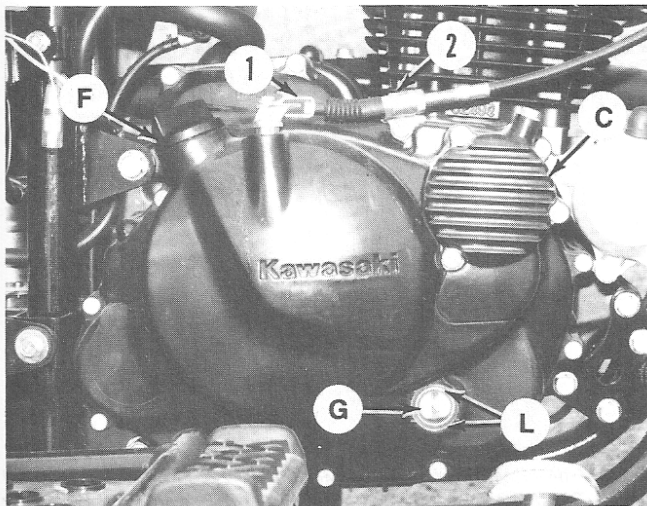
Engine/transmission sump is filled through filler plug opening (F). Oil level should be maintained between lines (L) next to sight glass (G). The oil filter is located behind cover (C). On models so equipped, detach clutch cable end at (1) and cable housing at (2) during crankcase cover removal.
